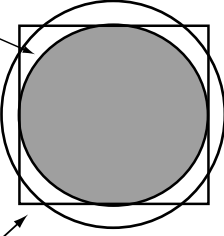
Footprint - 5 mils stencil - non solder mask defined
